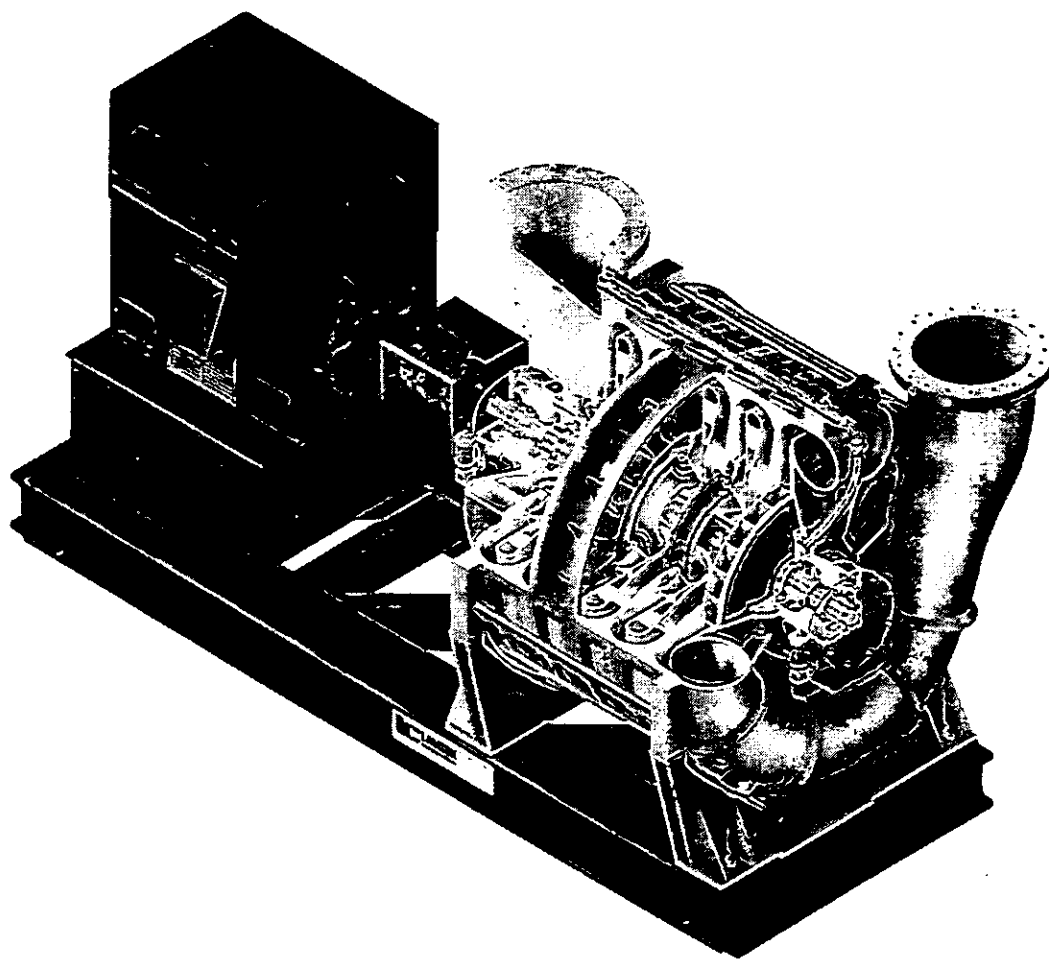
Cut-away view of a five-stage centrifugal compressor
